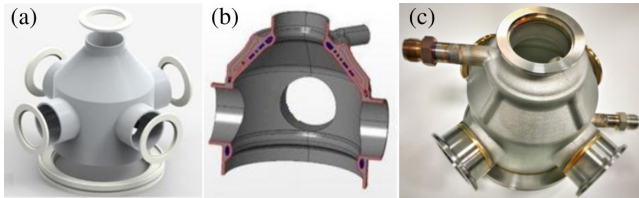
(a) CAD model with (b) internal flow channels, and (c) photograph of the additively manufactured vacuum chamber after welding of standard vacuum components [229].
